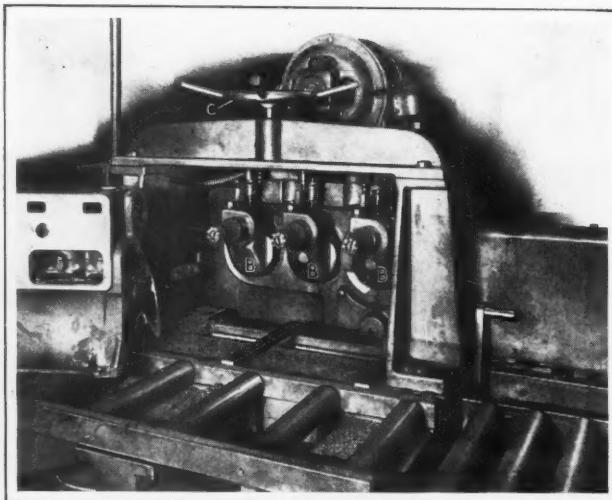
Machine Equipped with Three End-mills which Revolve Eccentrically for Finishing Two Pads Each
